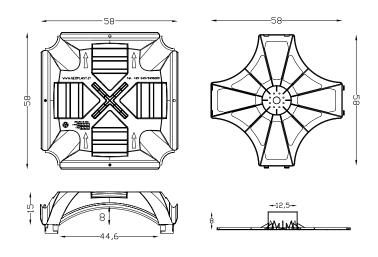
Shaft and base of the dimensional drawings NEW ELEVETOR TANK
